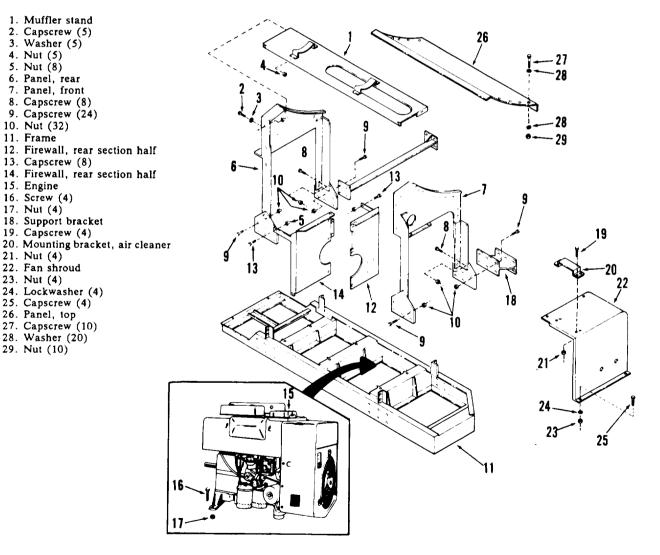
Engine, Base Frame, and Attaching Parts.
